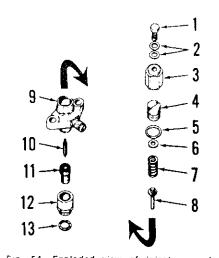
Exploded view of injector nozzle and holder, used on 354, 364 and 384 diesel.
